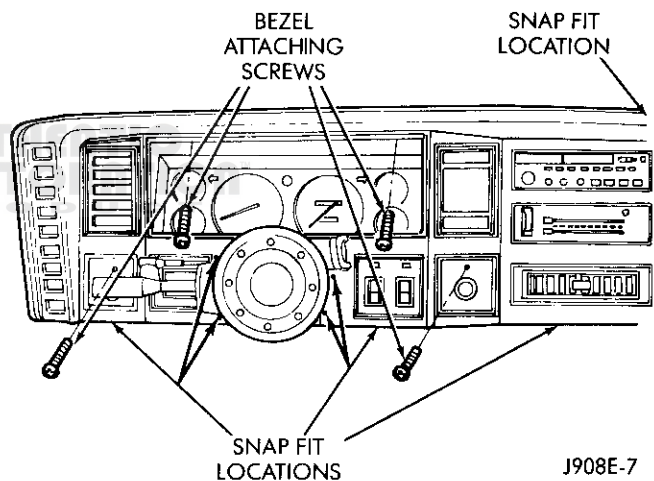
Instrument Bezel Removal/Installation—XJ and MJ
